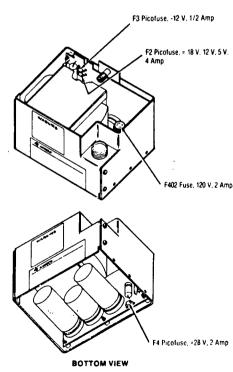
POWER SUPPLY FUSE LOCATIONS.
